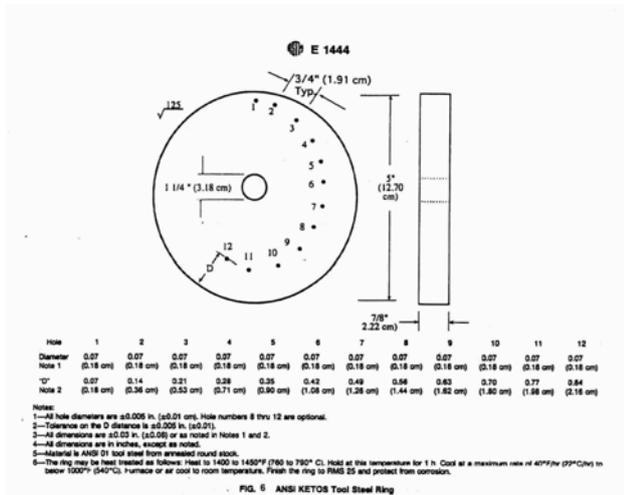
Manufacturing details of a Ketos Ring per ASTM E 1444
